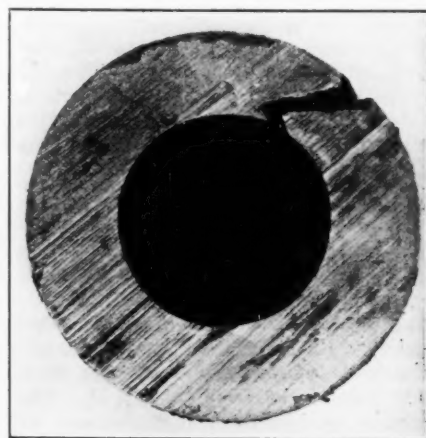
CROSS-SECTION OF A CYLINDER OF BESSEMER STEEL RUPTURED BY THE APPLICATION OF INTERNAL PRESSURE. THIS CYLINDER WAS ORIGINALLY 2 IN. OUTSIDE AND $1\frac{1}{2}$ IN. INSIDE DIAMETER. THE INNER HOLE HAS BEEN STRETCHED TO $1\frac{3}{8}$ IN.
